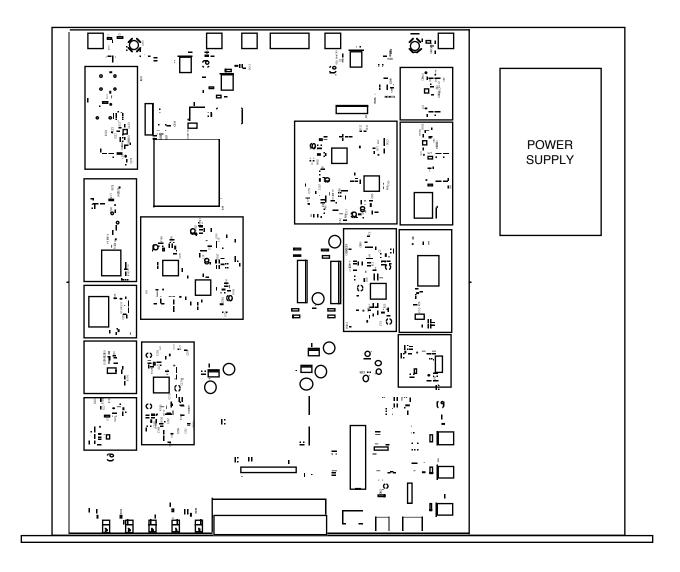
Model 3117-2525-1216# Mechanical Assembly
